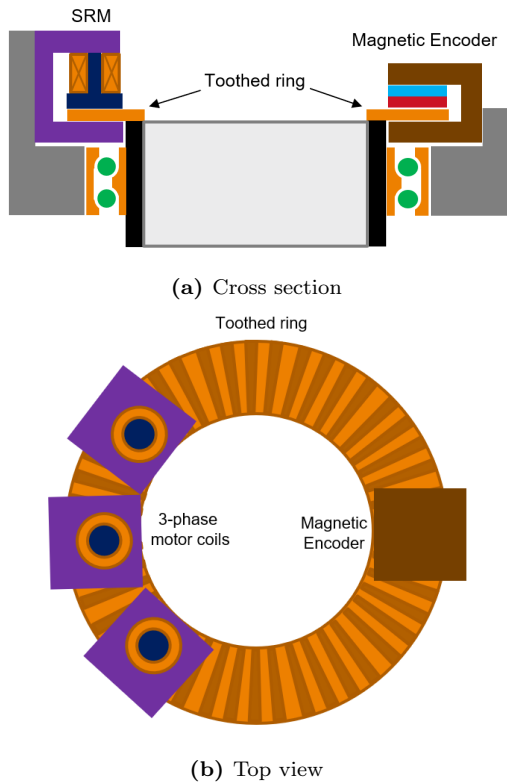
Conceptual layout of a CPA motorization axis with SRM, Magnetic Encoder, toothed ring and bearings.
